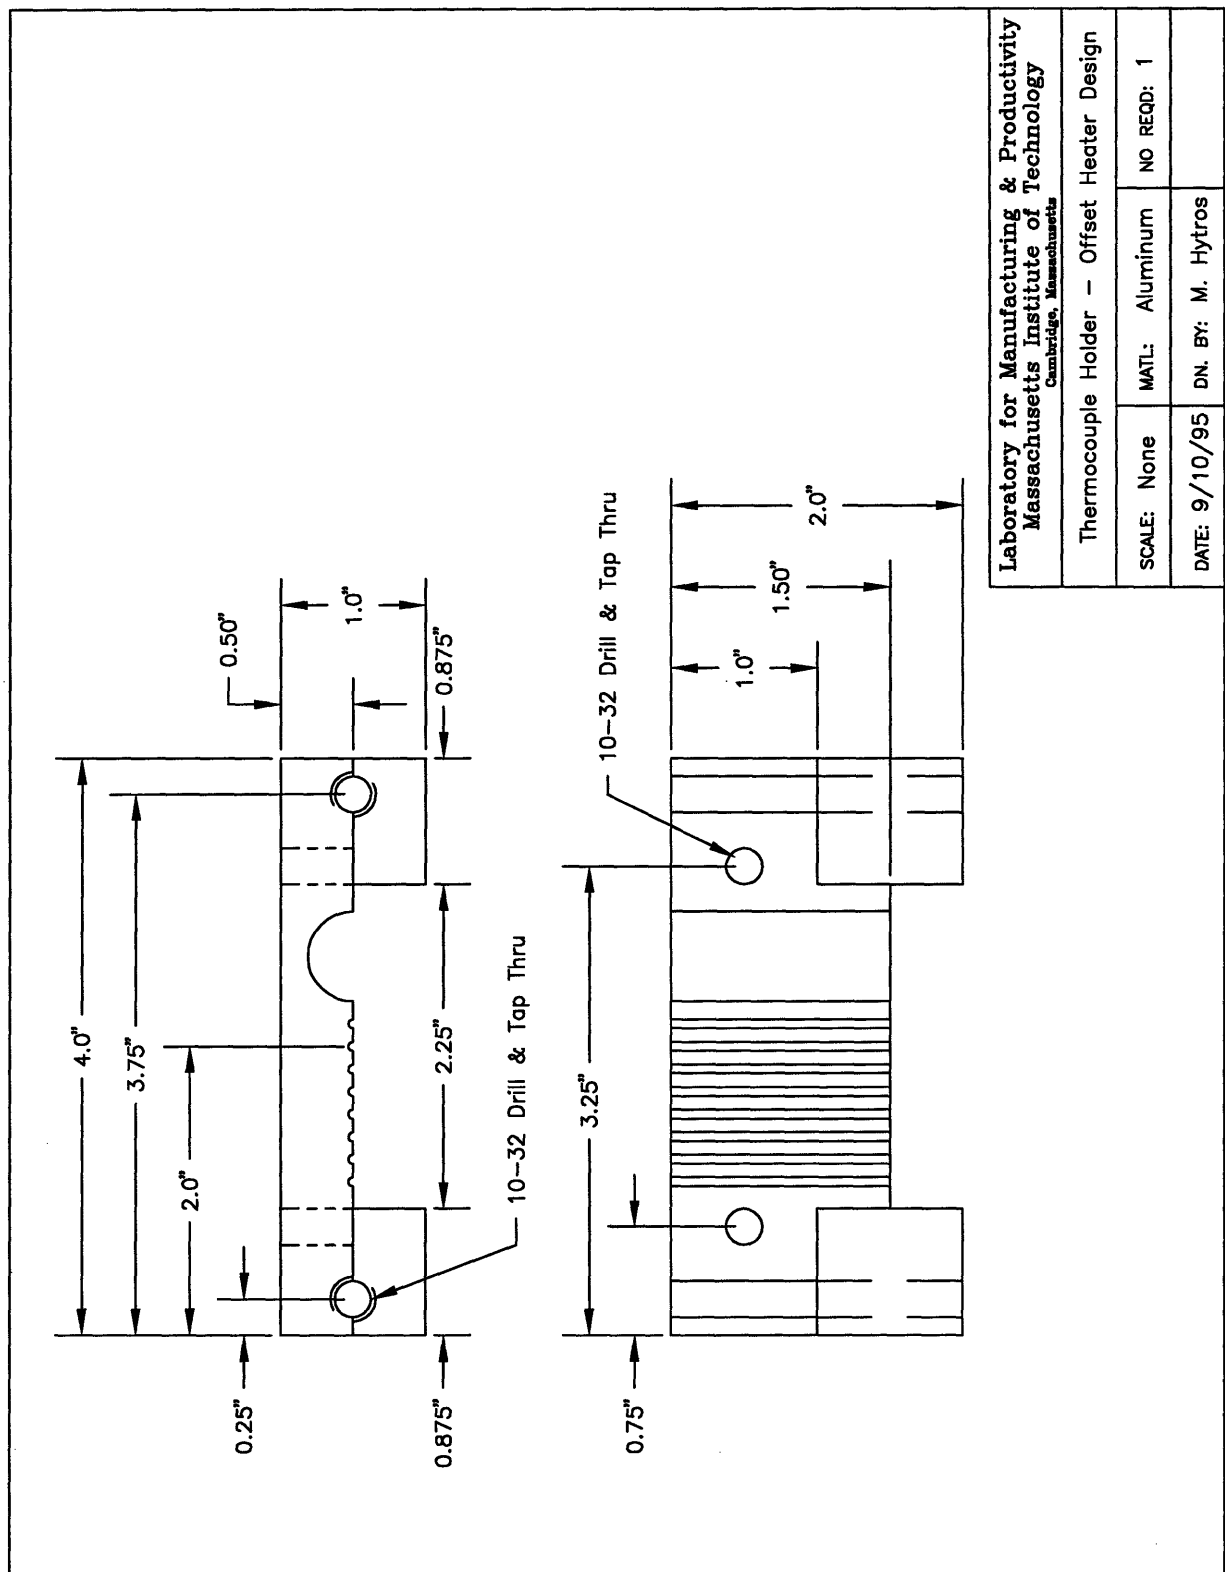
Detail Drawing of Thermocouple Holder for Offset Heater Design
